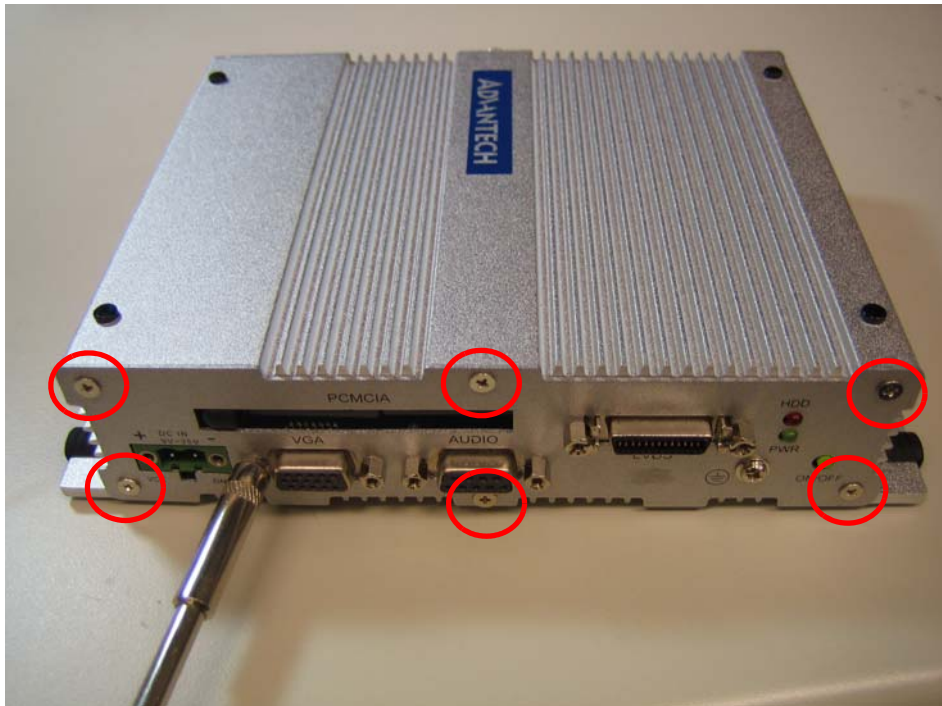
Unscrew the 4 Hex-bolt on the front face plate
